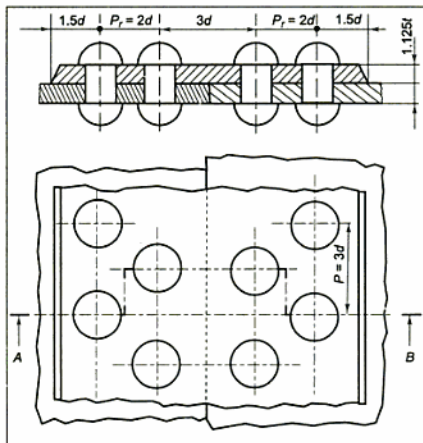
Double Riveted, Single Cover, Zigzag Butt Joint
